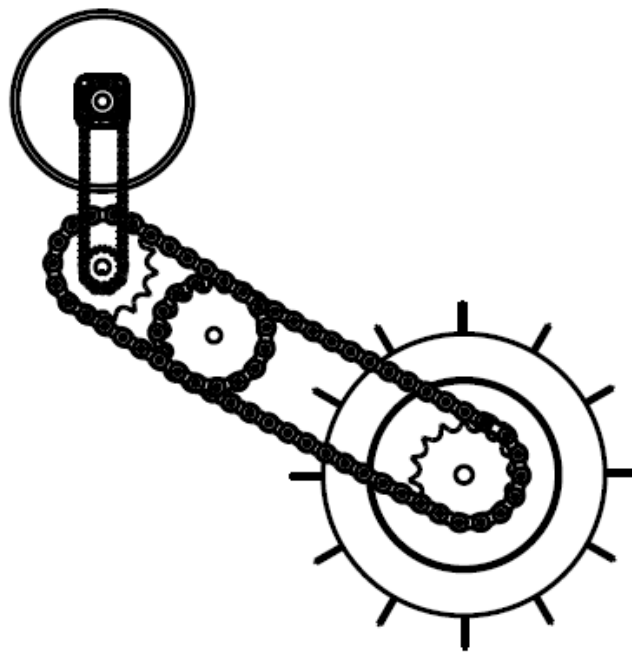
(b) Power transmission system in prototype pneumatic seed planter (Side view)
